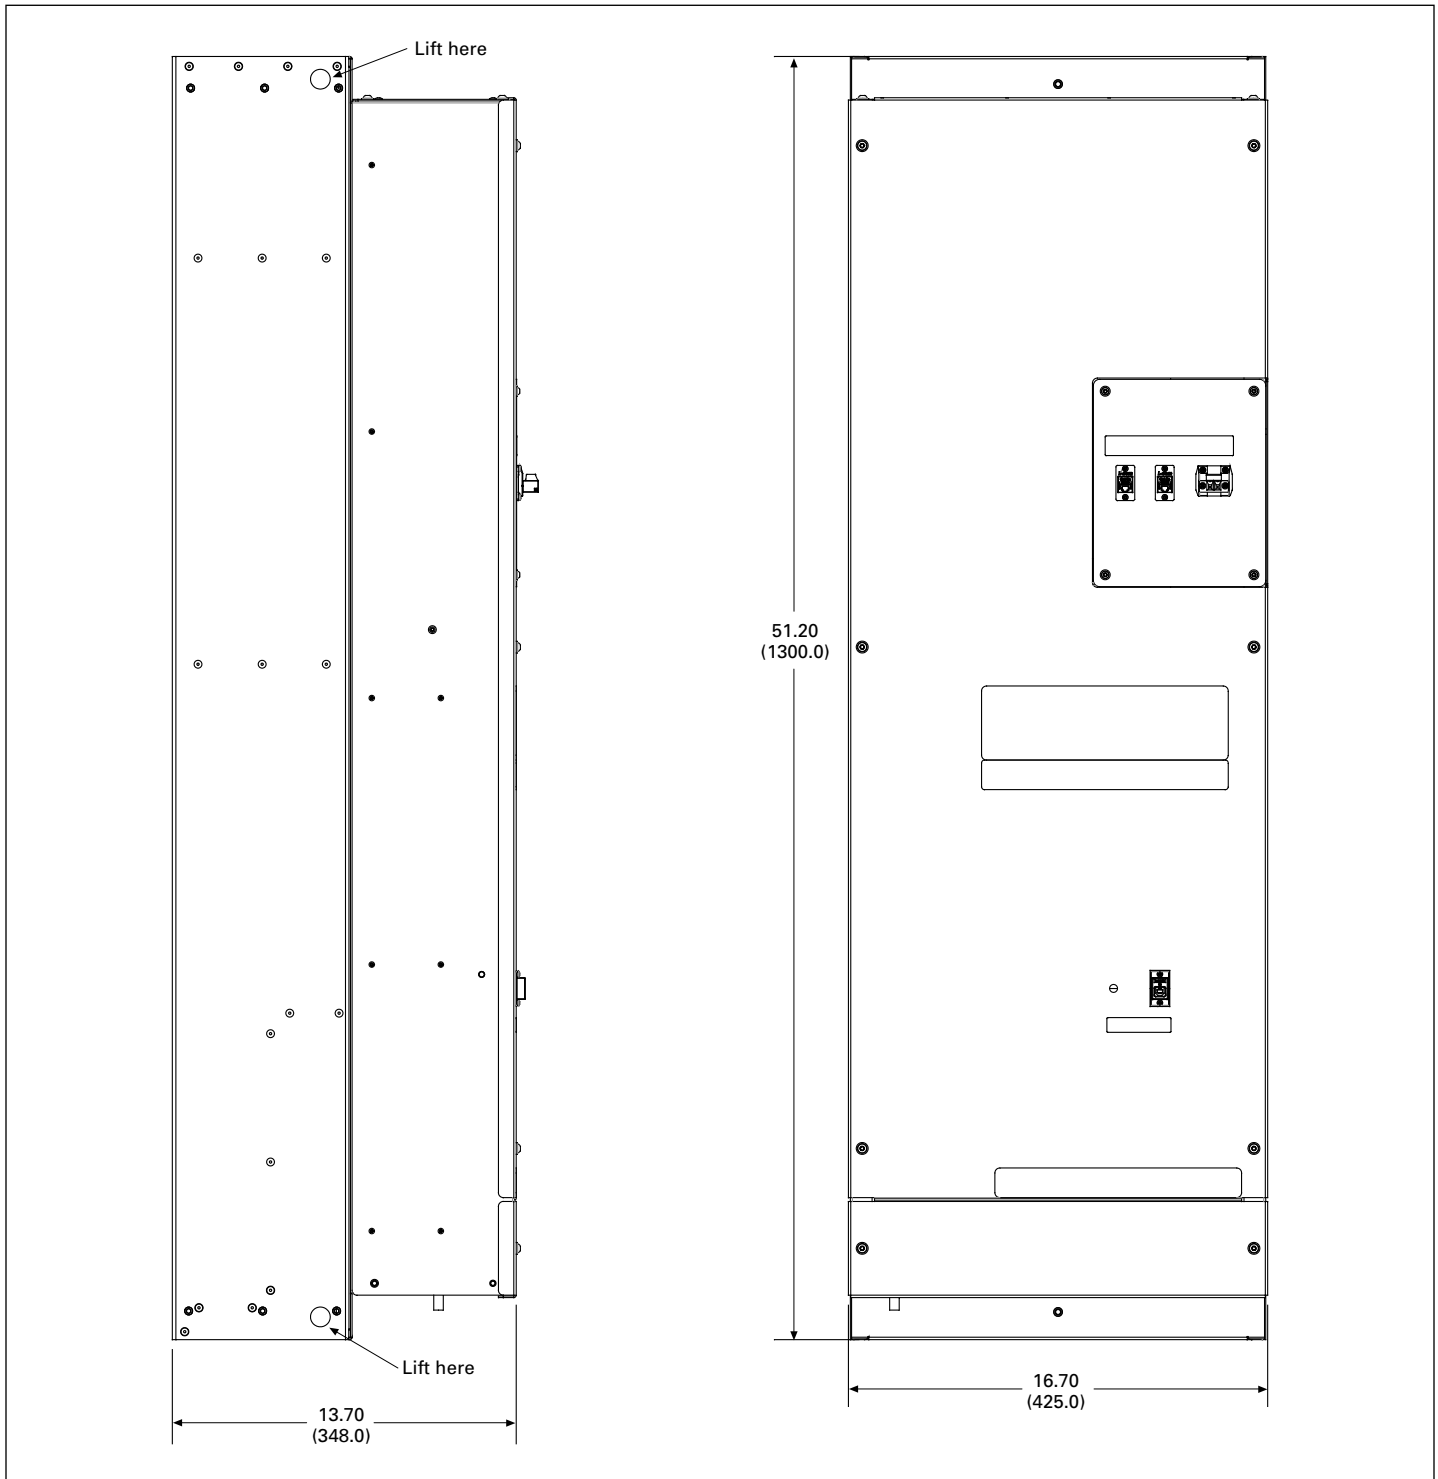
Chassis mount 60 A—dimensions in inches (mm)
